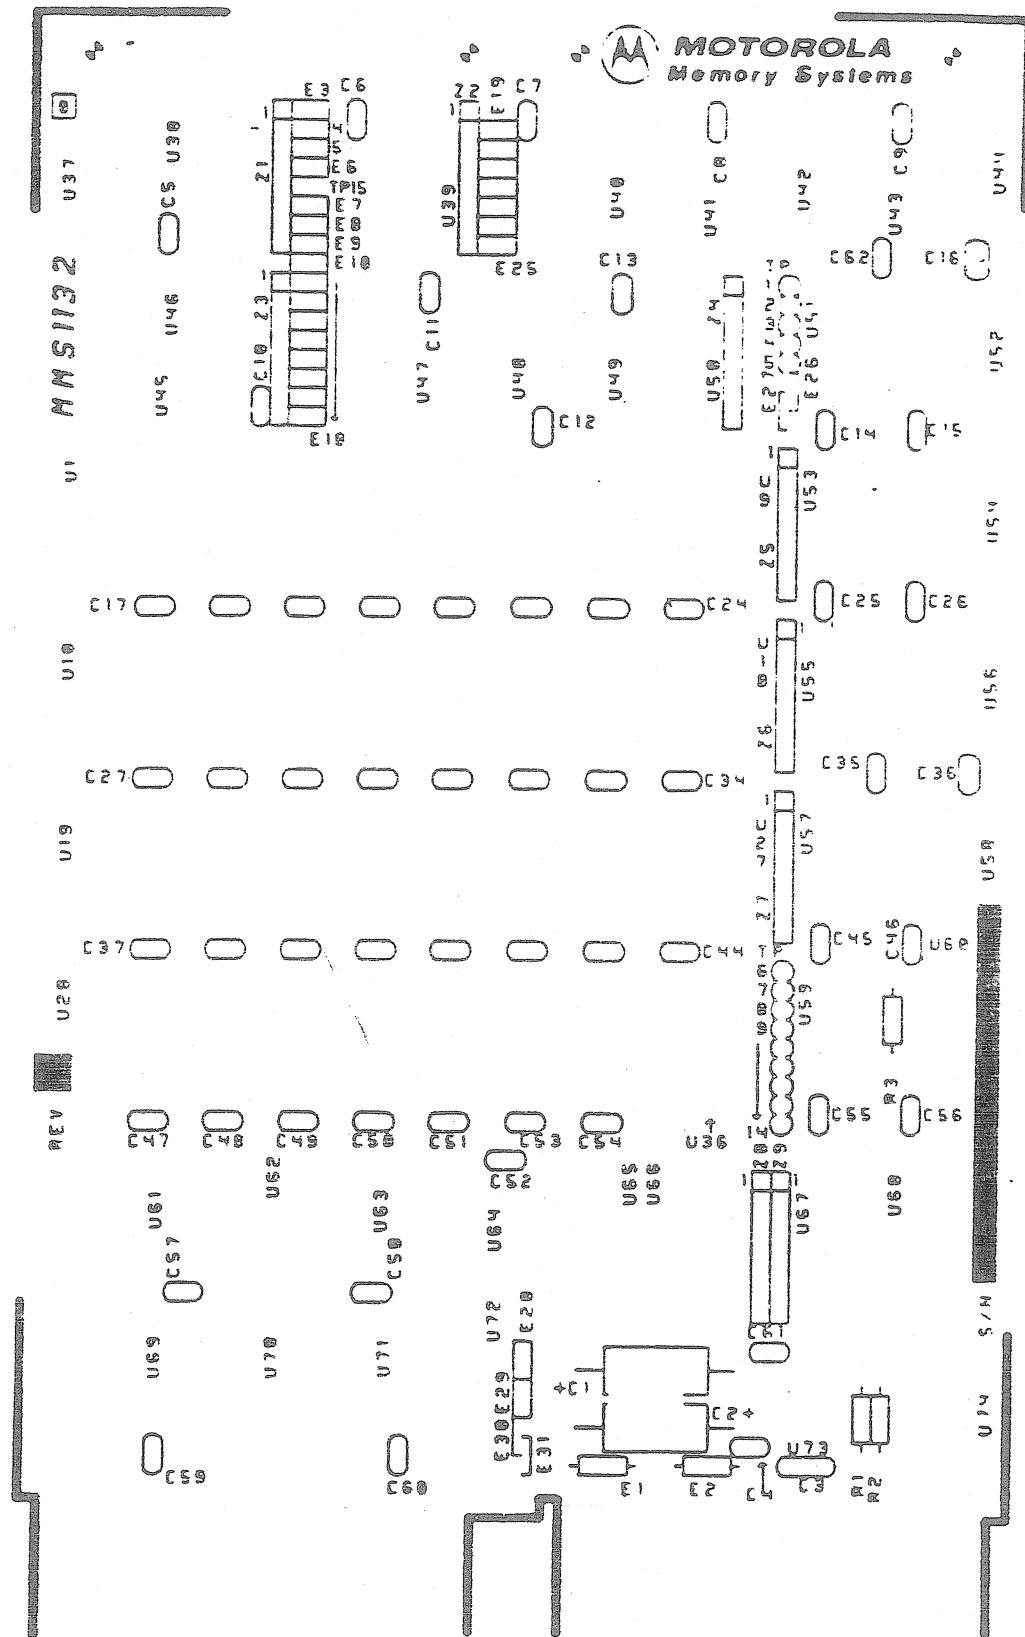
BOARD OUTLINE AND COMPONENT LAYOUT
